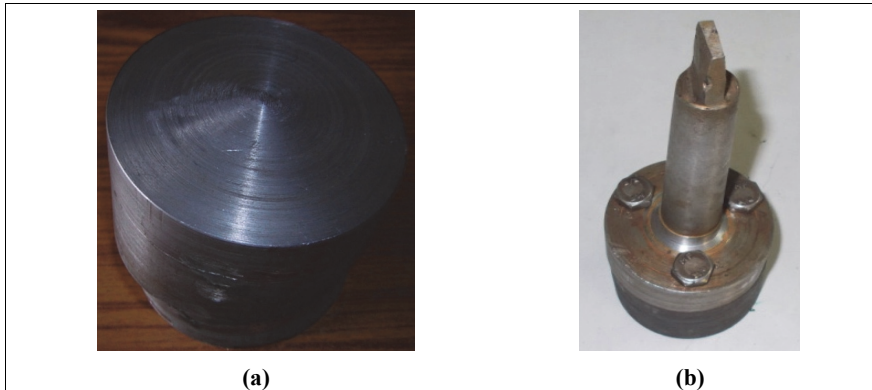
Illustration of Conical Front End of Rotary Die & Assembled Rotary Forging Die.
